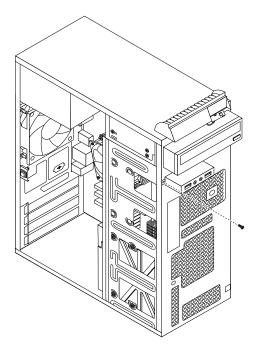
Removing the screw that secures the front audio and USB assembly to the chassis
